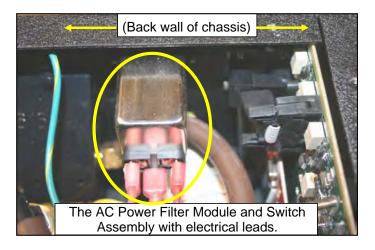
THE ADH NETCOM AUTOMATIC AIR DEHYDRATOR AC POWER FILTER MODULE AND SWITCH ASSEMBLY.
